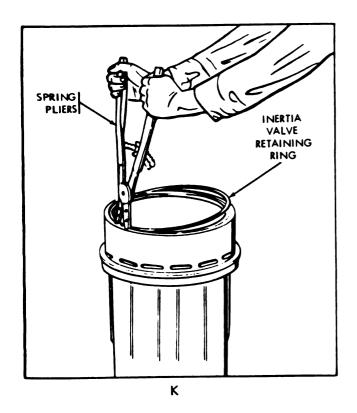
Recoil mechanism disassembly or assembly (2 of 5).
